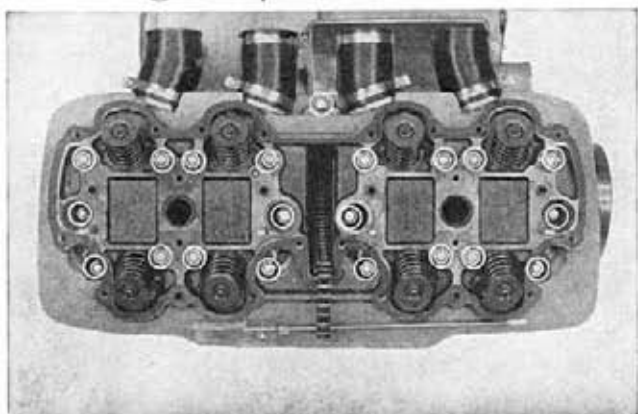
Removing cylinder head mounting nuts and bolts
